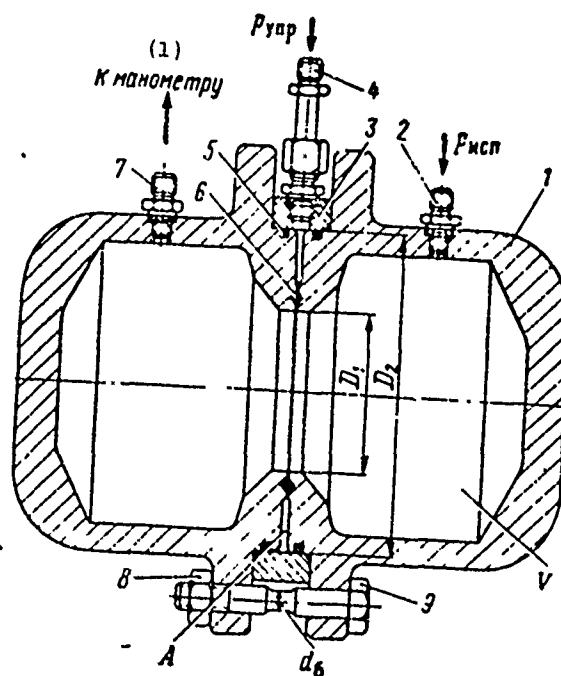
Diagram of the valve simulator: 1 - half of the housing; 2, 4, 7 - connectors; 3 - ring; 5, 6 - rubber seal rings; 8 - nut; 9 - explosive bolt. KEY: (1) To manometer
